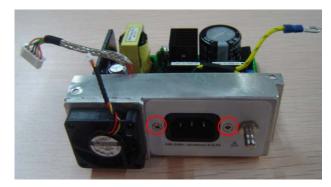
Disassembly of Fan of AC-DC Board (1)
